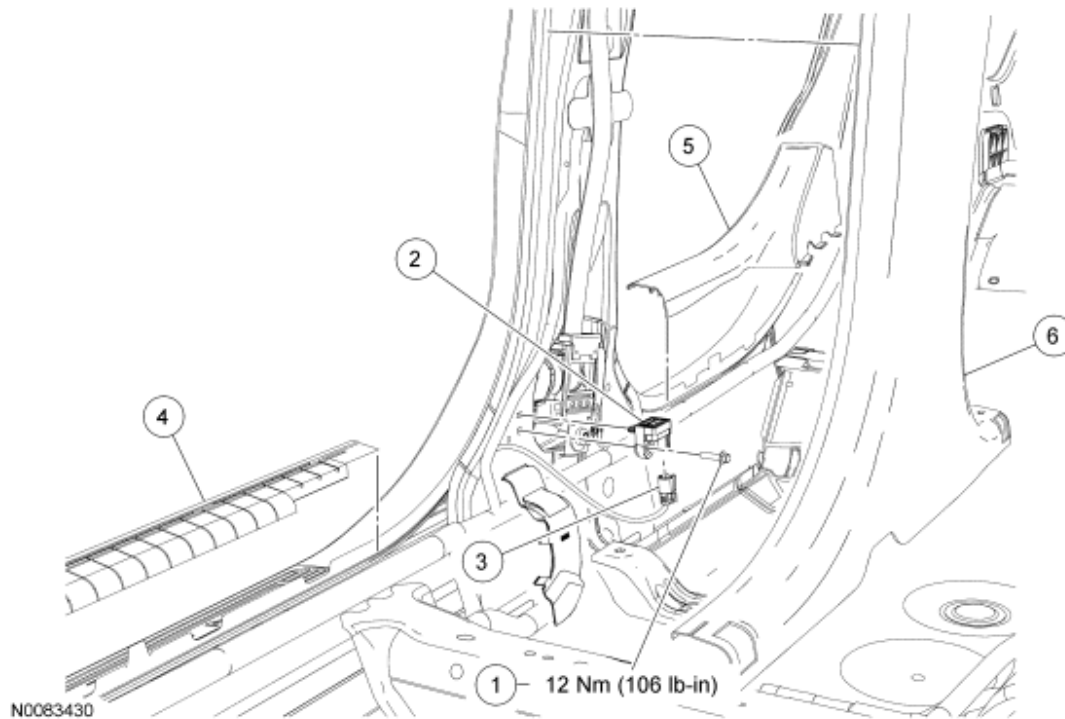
Exploded View Of Side Impact Sensor With Torque Specification - B-Pillar
